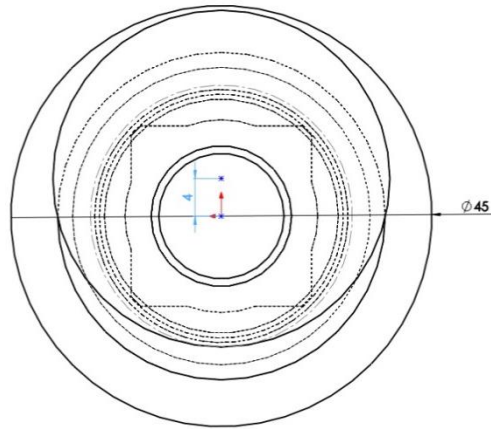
Frontal view of the input shaft drawing in which the measures of overall diameter and eccentricity are shown.
